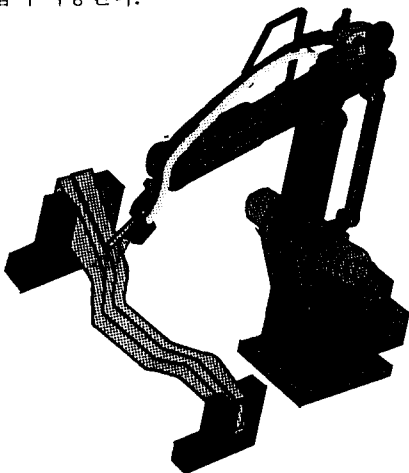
Laser-vision systems for arc welding of car frame
